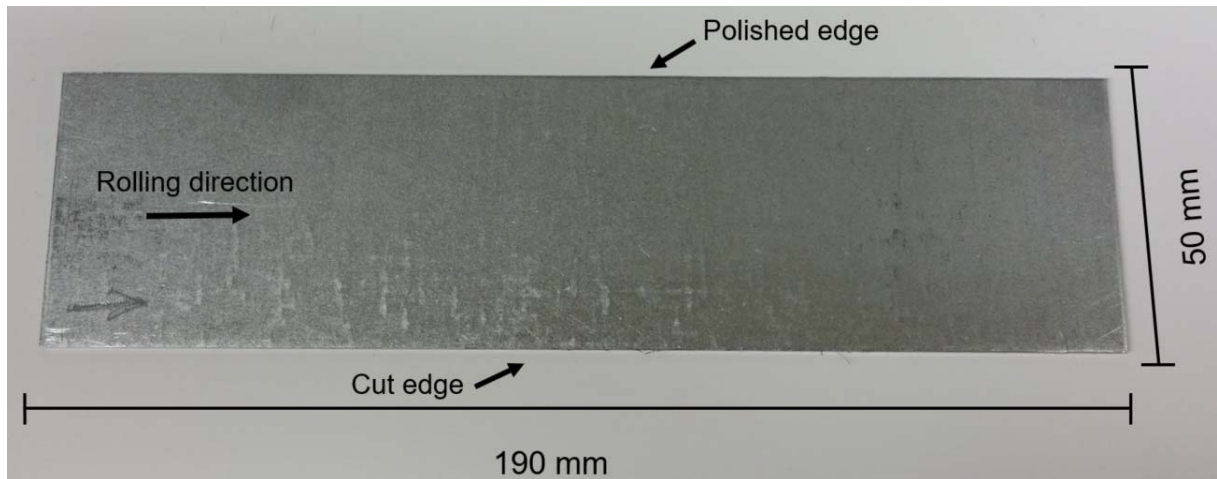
A test specimen with one polished and one cut edge. This type of specimen was used during both the pre-test and experimental tests.
